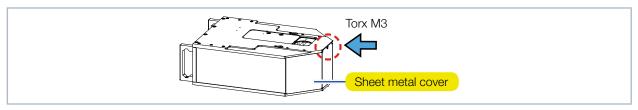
Removing/mounting the sheet metal cover on the PowerMonitor PM 48
